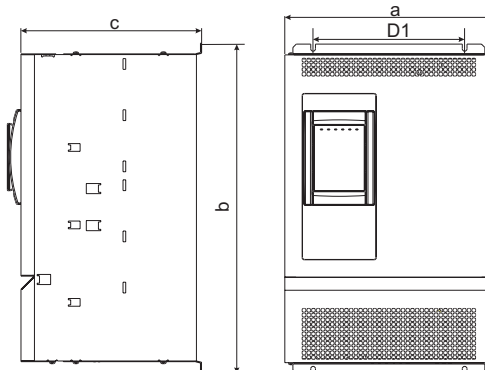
Mounting Methods, Sizes 4220 up to 81600 (230...480Vac) and 4025 up to 8200 (575Vac)
